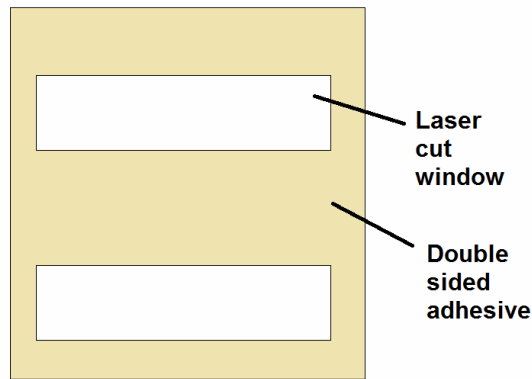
CAD drawing of the anode/cathode adhesive. GDLs are sized to fit inside the two laser-cut windows in the adhesive layer
